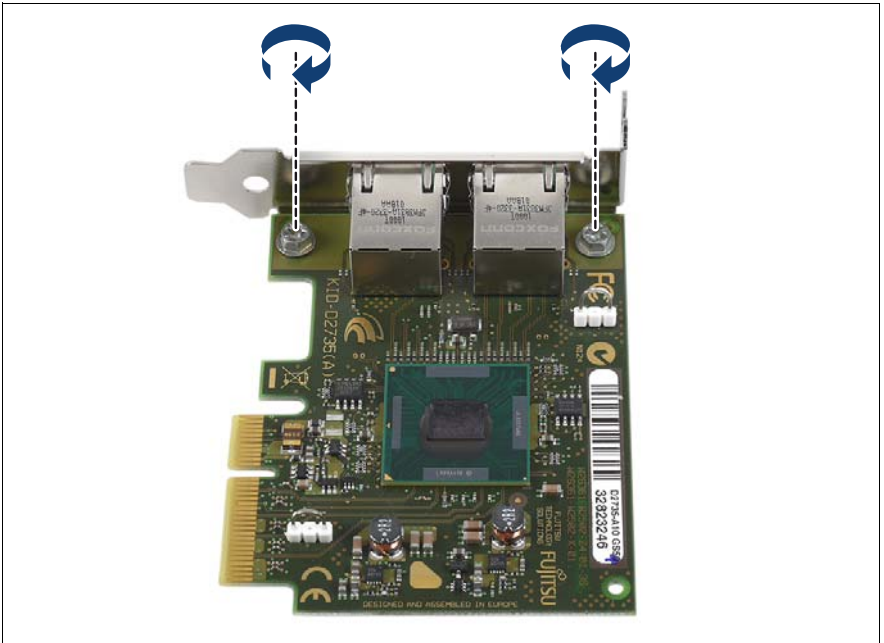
Network adapter D2735 - Mounting the slot bracket (B)
